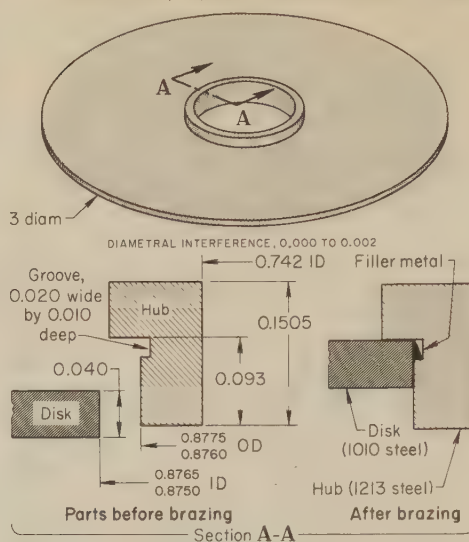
Brazed type-wheel assembly for which cleaning method was changed from tumbling in abrasive oxides to belt sanding to improve flow of filler metal (Example 552)
